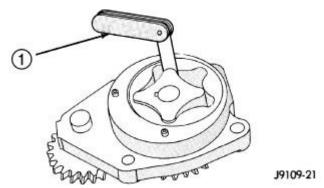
Measuring Clearance Between Gerotor Tip & Housing Courtesy of CHRYSLER GROUP, LLC
